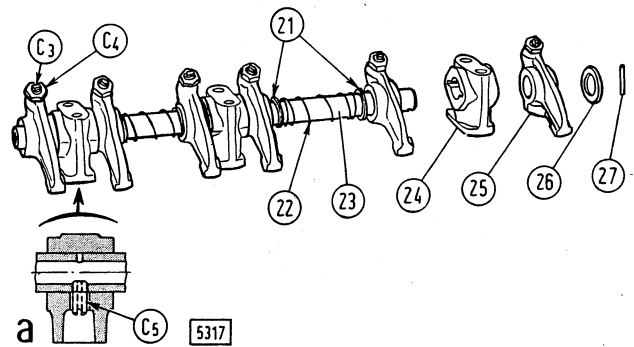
Rocker arms and their supports, springs and shafts.
